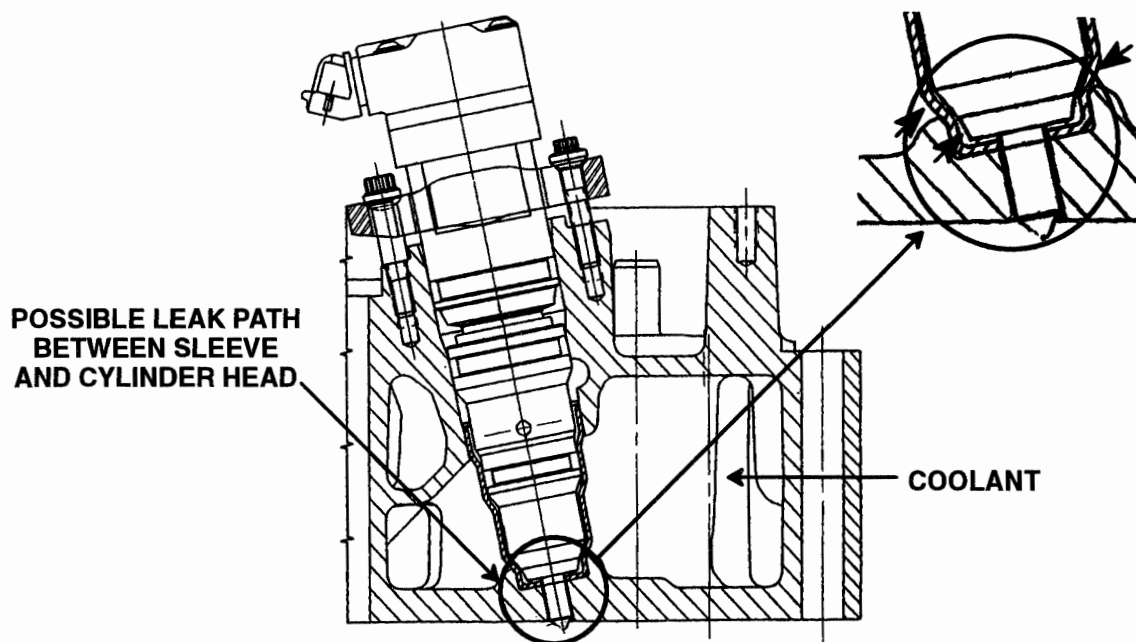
Injector Sleeve – Combustion Gas Leak Path
